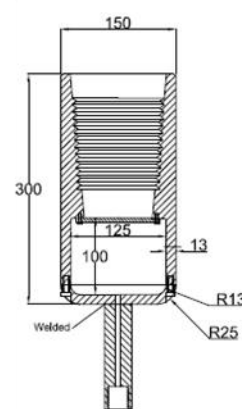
Coupling system used to lock the tool to the drill bit.
